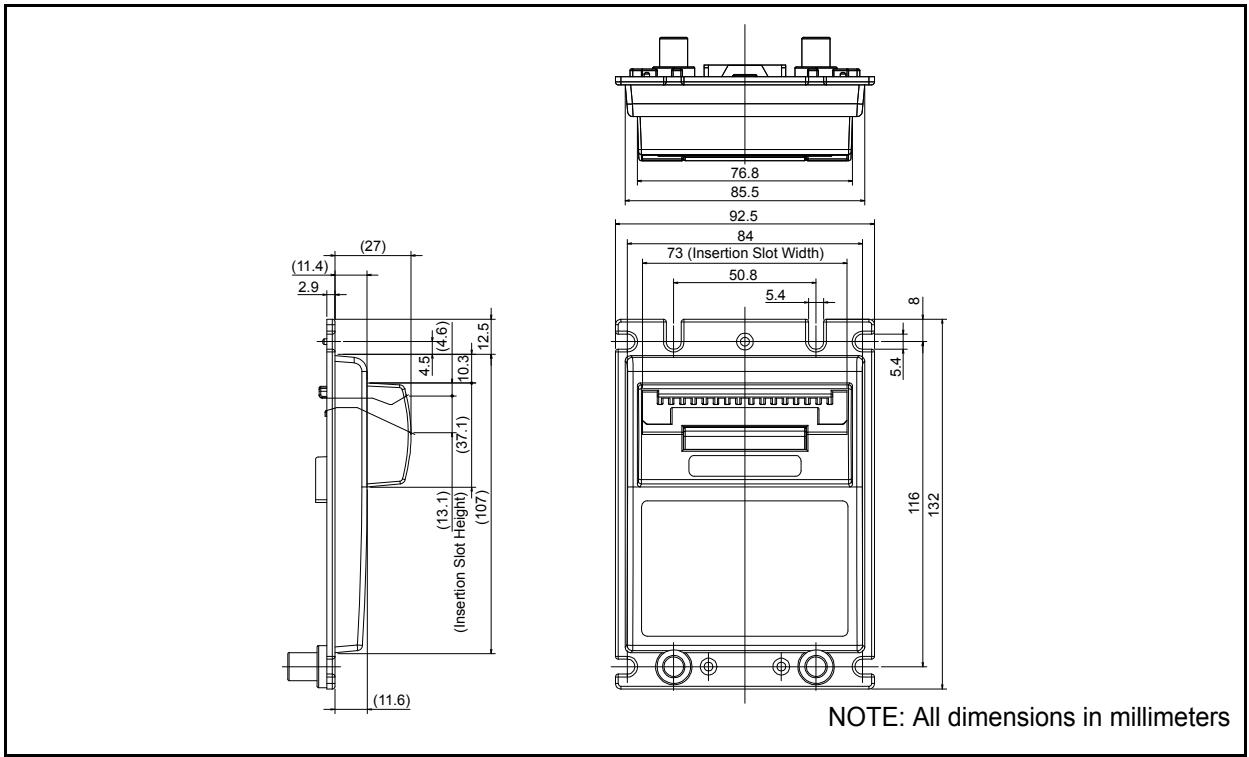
DBV-500 Bezel Type2 Outside Dimensions
